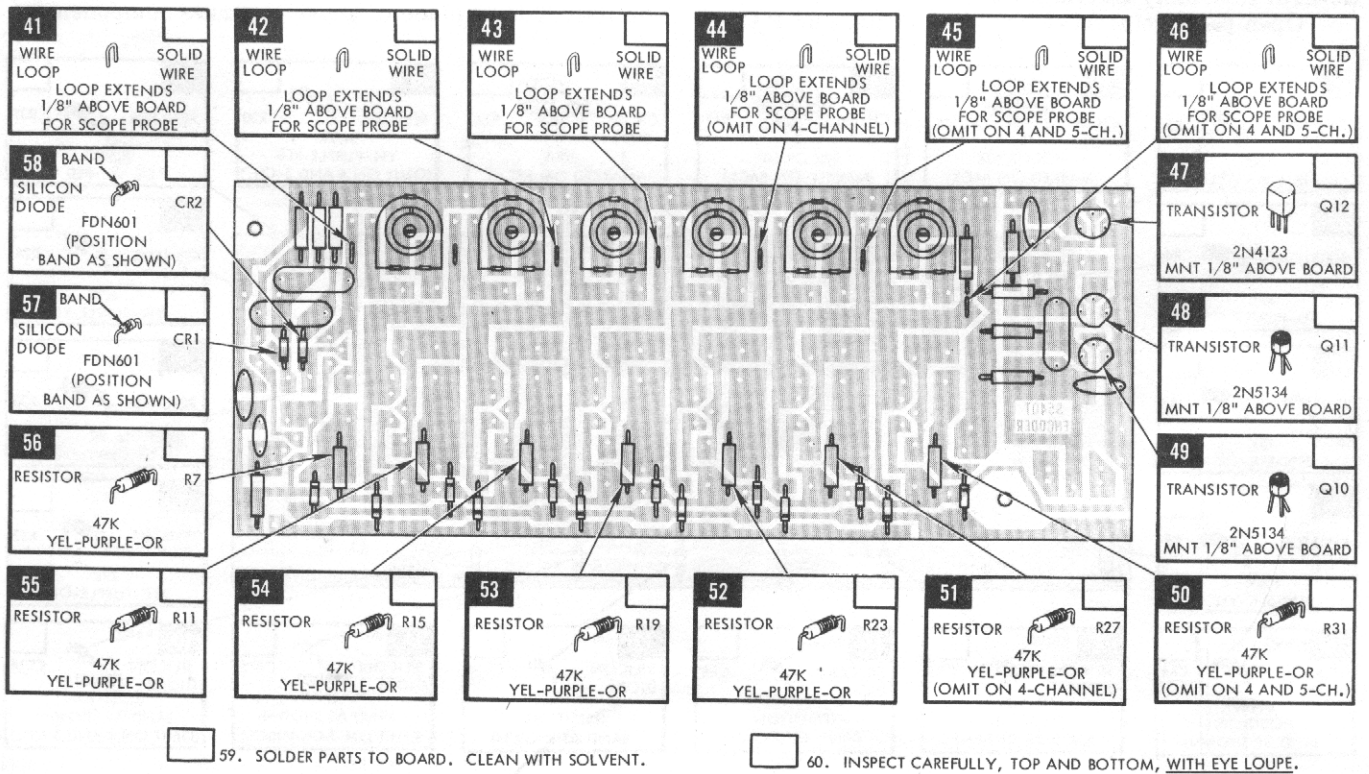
Logic Board Assembly (Sheet 3 of 6)
